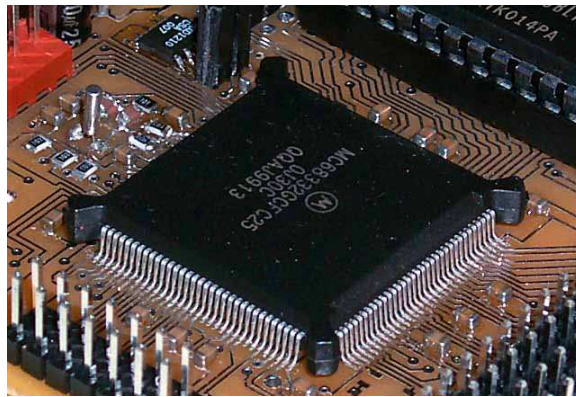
Surface Mount IC with Good Solder Joints, [5]
